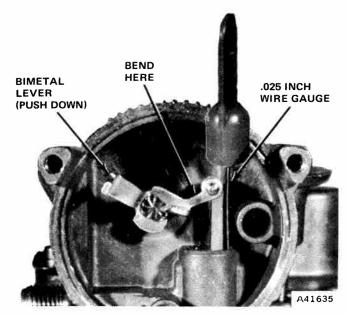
Initial Choke Valve Clearance Adjustment
